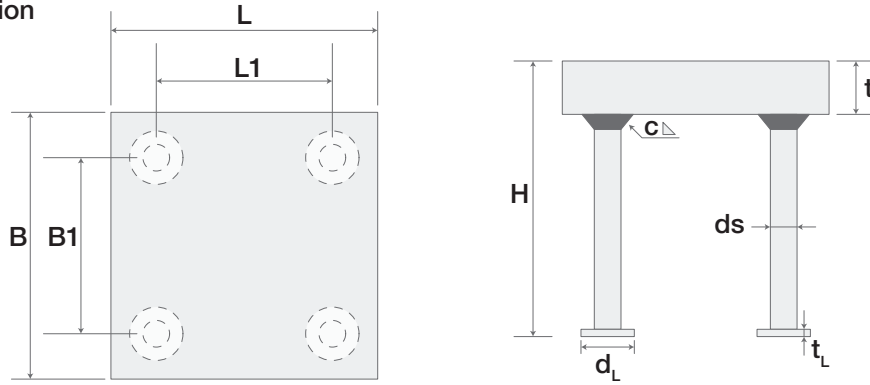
EFP FASTENING PLATE DIMENSIONS
